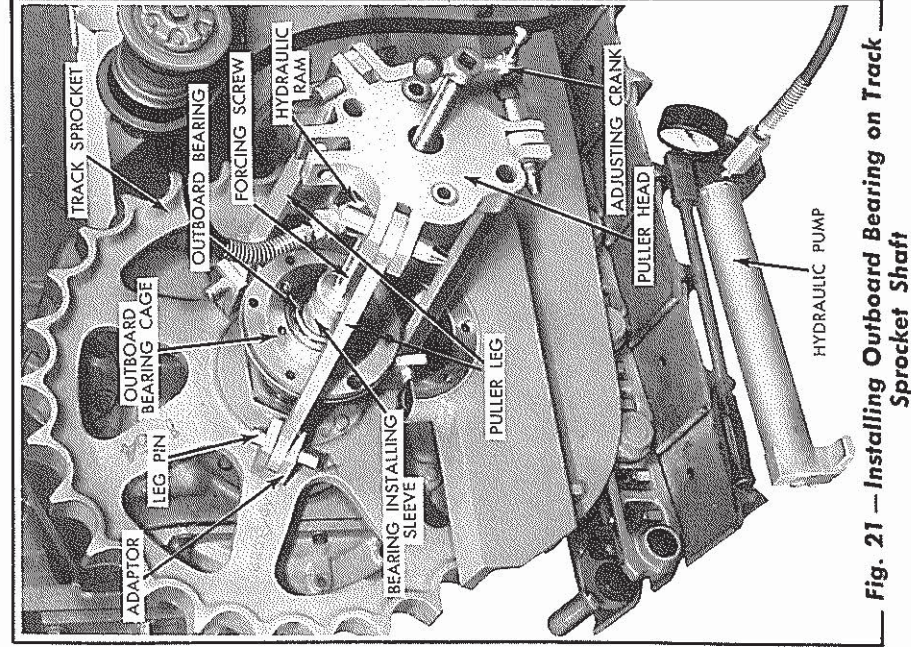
Installing Outboard Bearing on Track Sprocket Shaft
